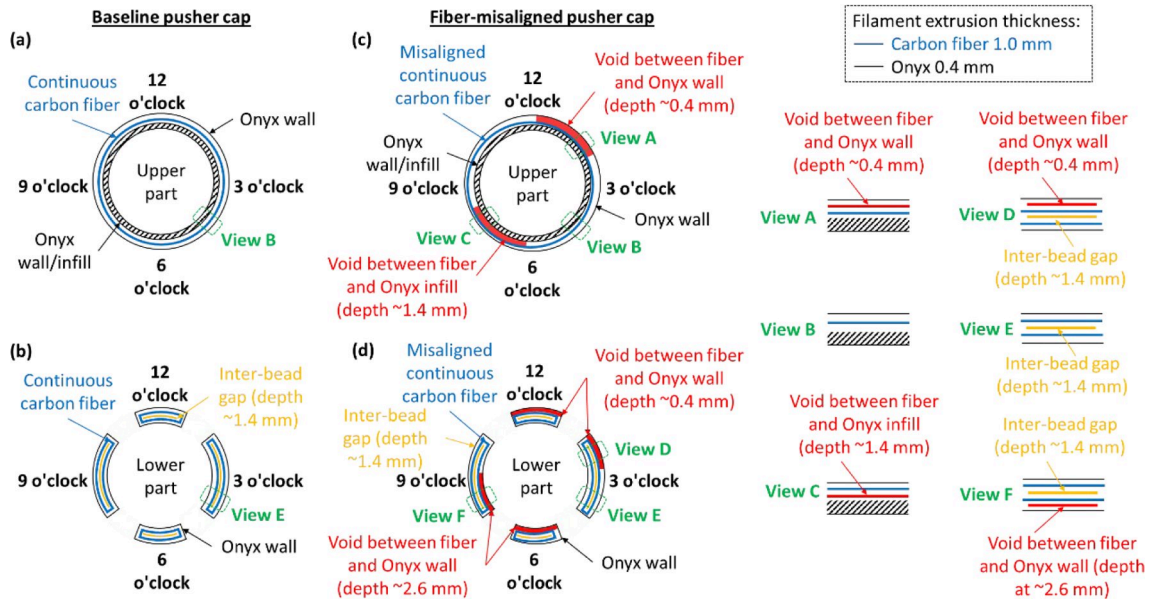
Expected internal conditions of pusher caps (a) Baseline: upper part (b) Baseline: lower part (c) Fiber-misaligned: upper part (d) Fiber-misaligned: lower part
